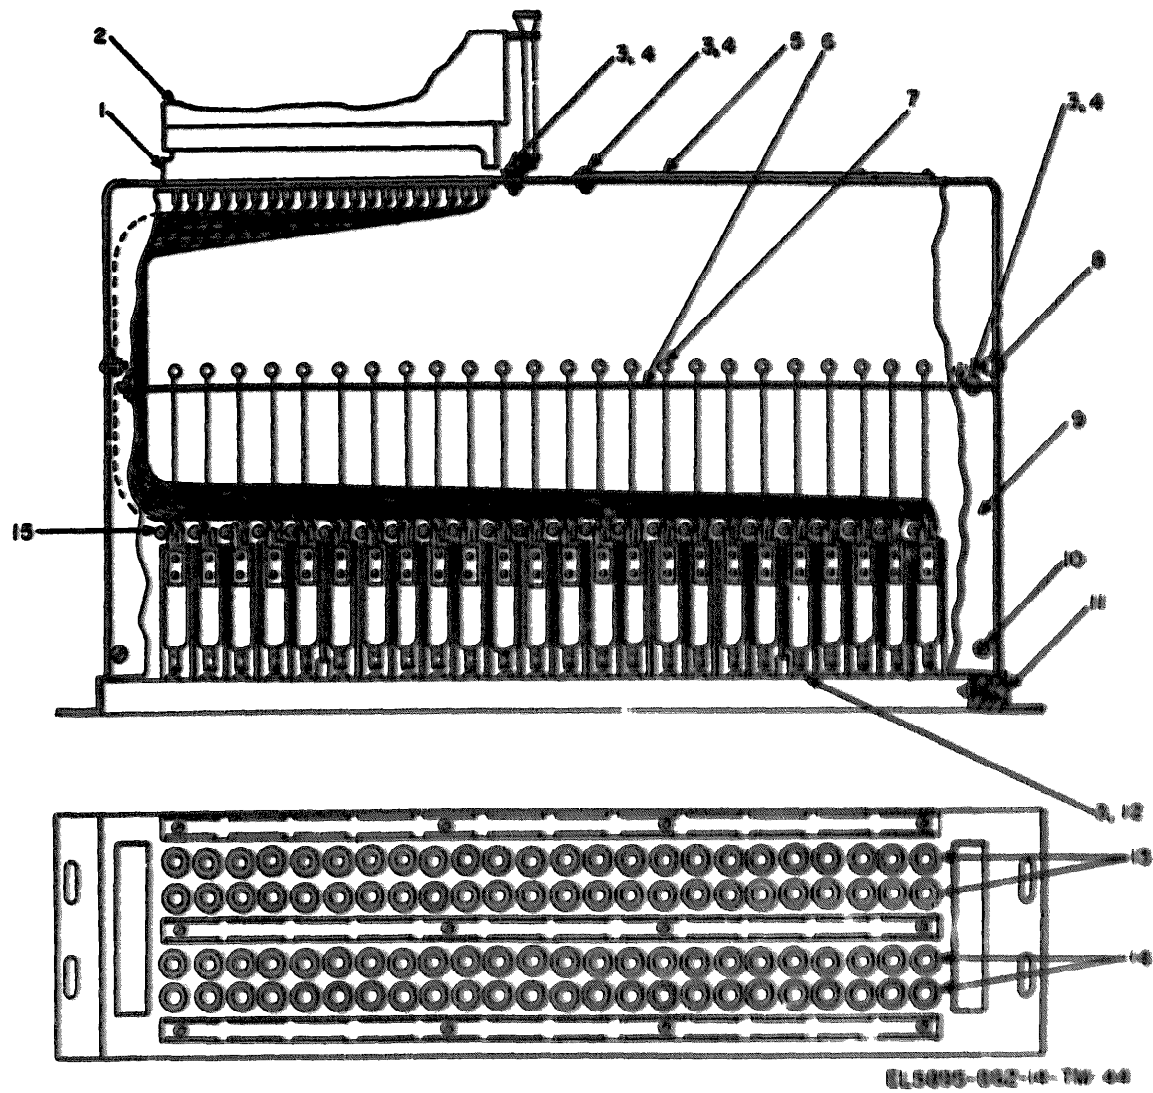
Patch Panel Assembly DC Xmit Low and Patch Level Parts Location
